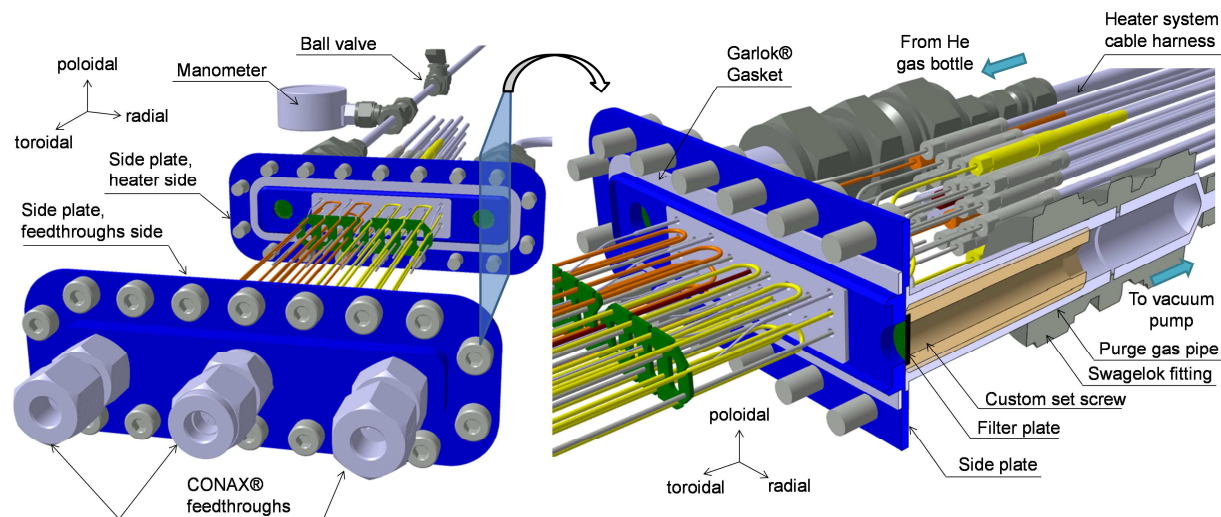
Side plates of PREMUX. Left: general isometric view of the side plates, with section cut plane highlighted in semi-transparent blue colour. Right: 3D cutoff view of the side plate with attached heater system and purge gas piping structure.
